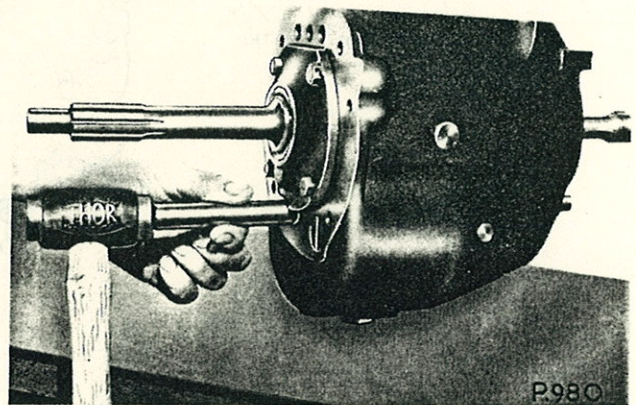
Tapping out the layshaft spindle using the dummy spindle
